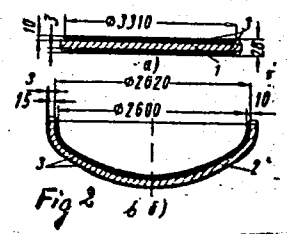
blank (a) and stamped bottom with external and inner technological inserts
